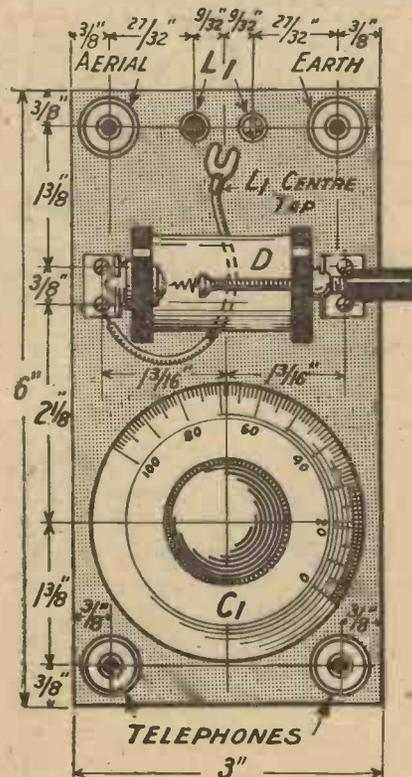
Mark your panel out to conform with the dimensions given in this drawing.
